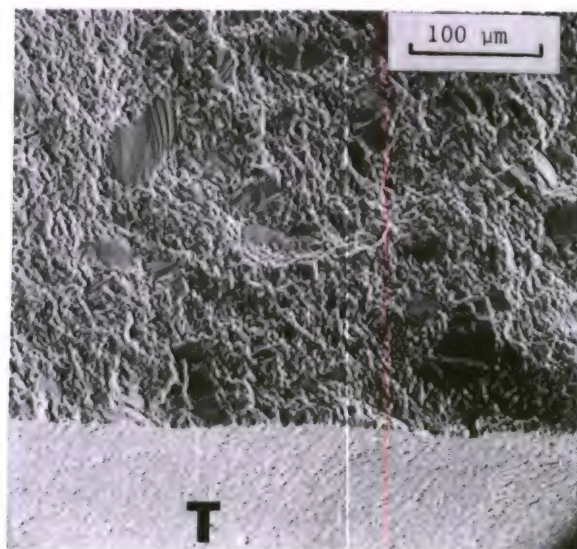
Fracture surface of NC 433 control sample. Fracture stress was 322 MPa.
